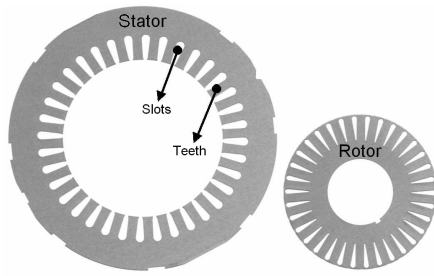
Magnetic steel sheets of the stator and rotor core.
